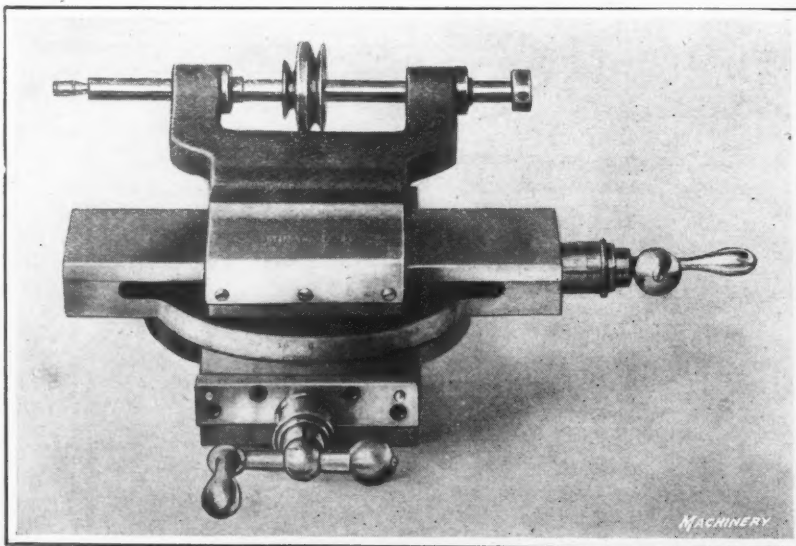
Slide Spindle Grinding Attachment for the Bench Lathe, which is used in performing Lapping Operations
